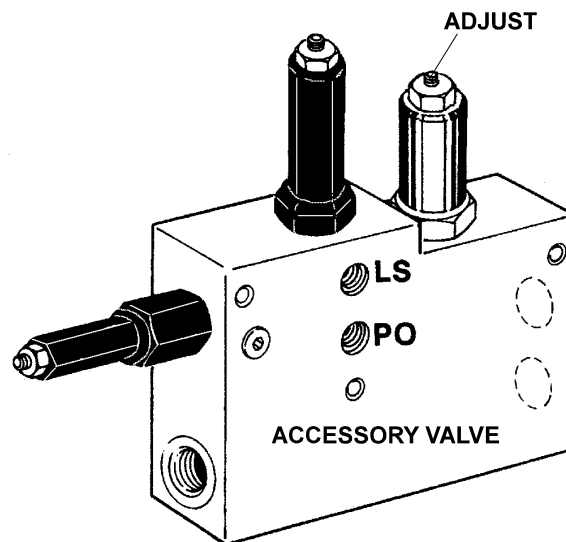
Vickers Proportional Valve Pressure Setting - Prior to 1989 with Accessory Valve (Sheet 3 of 4)
